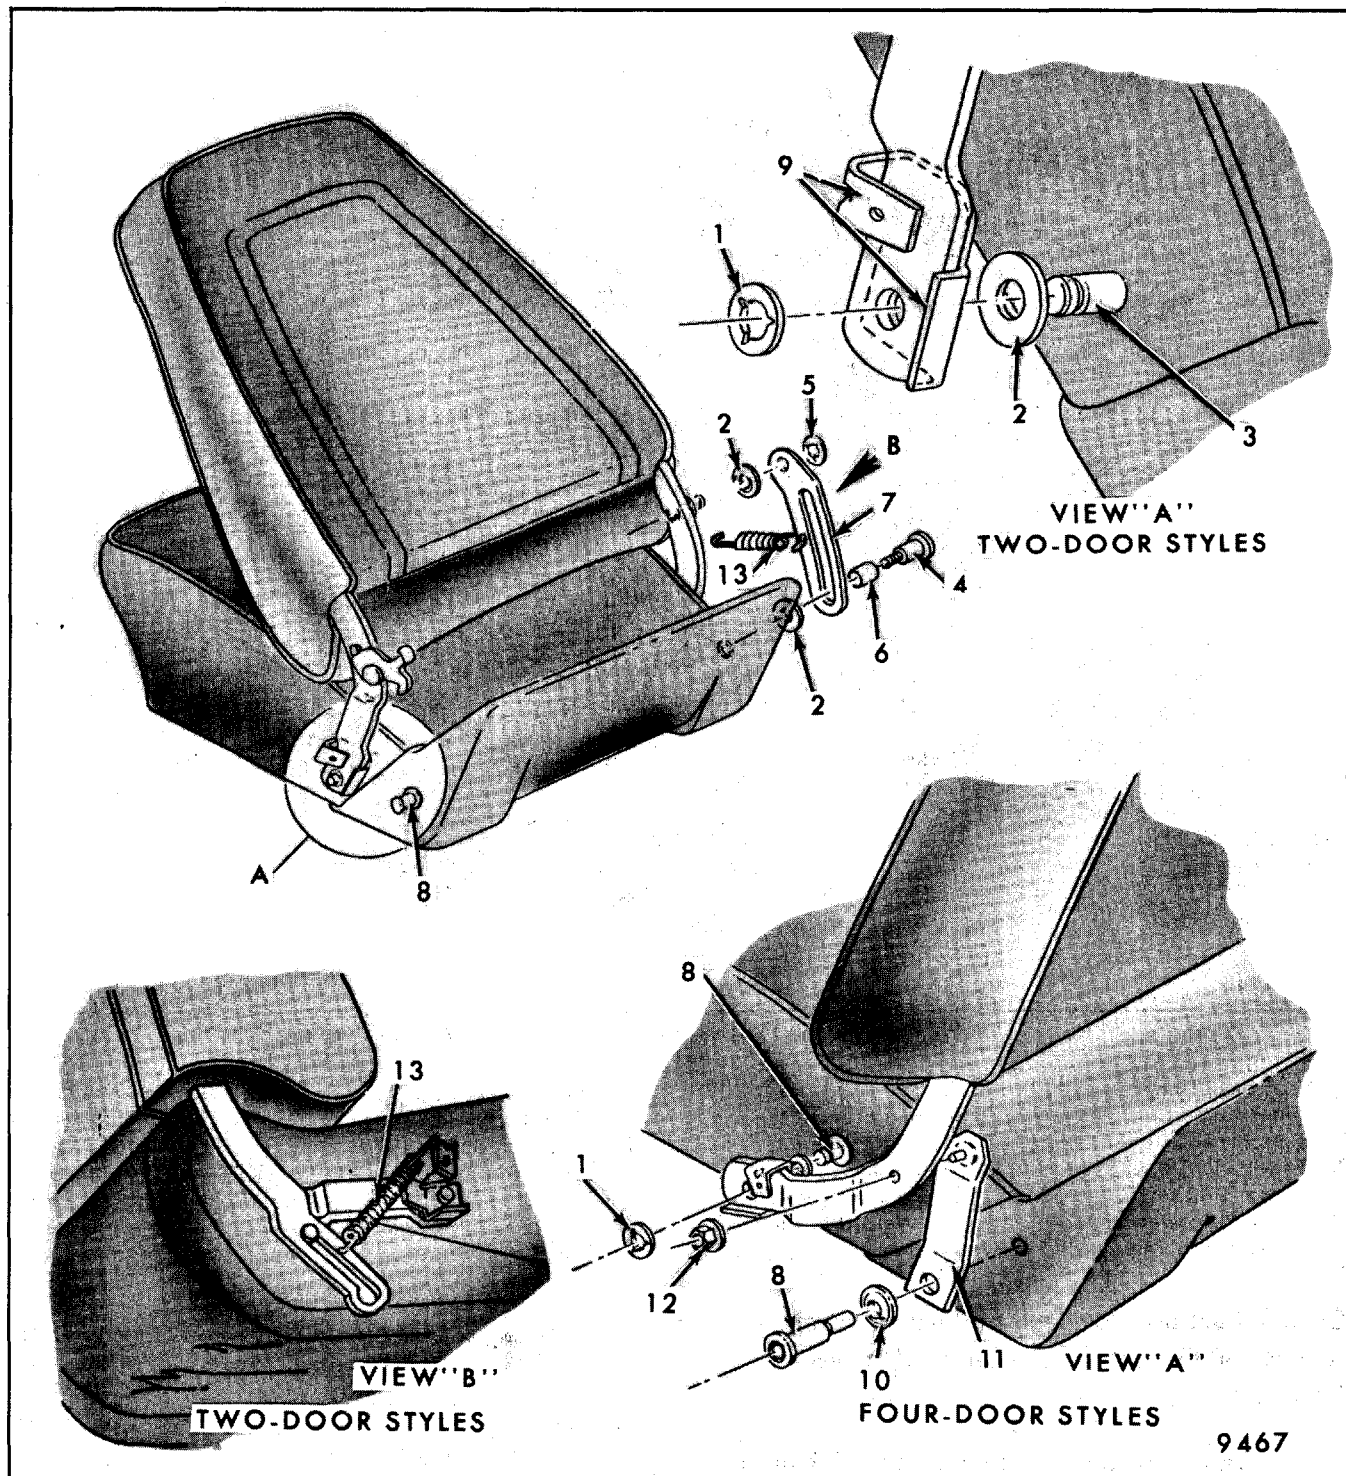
Seat Back Assembly - Standard Bucket Seats
